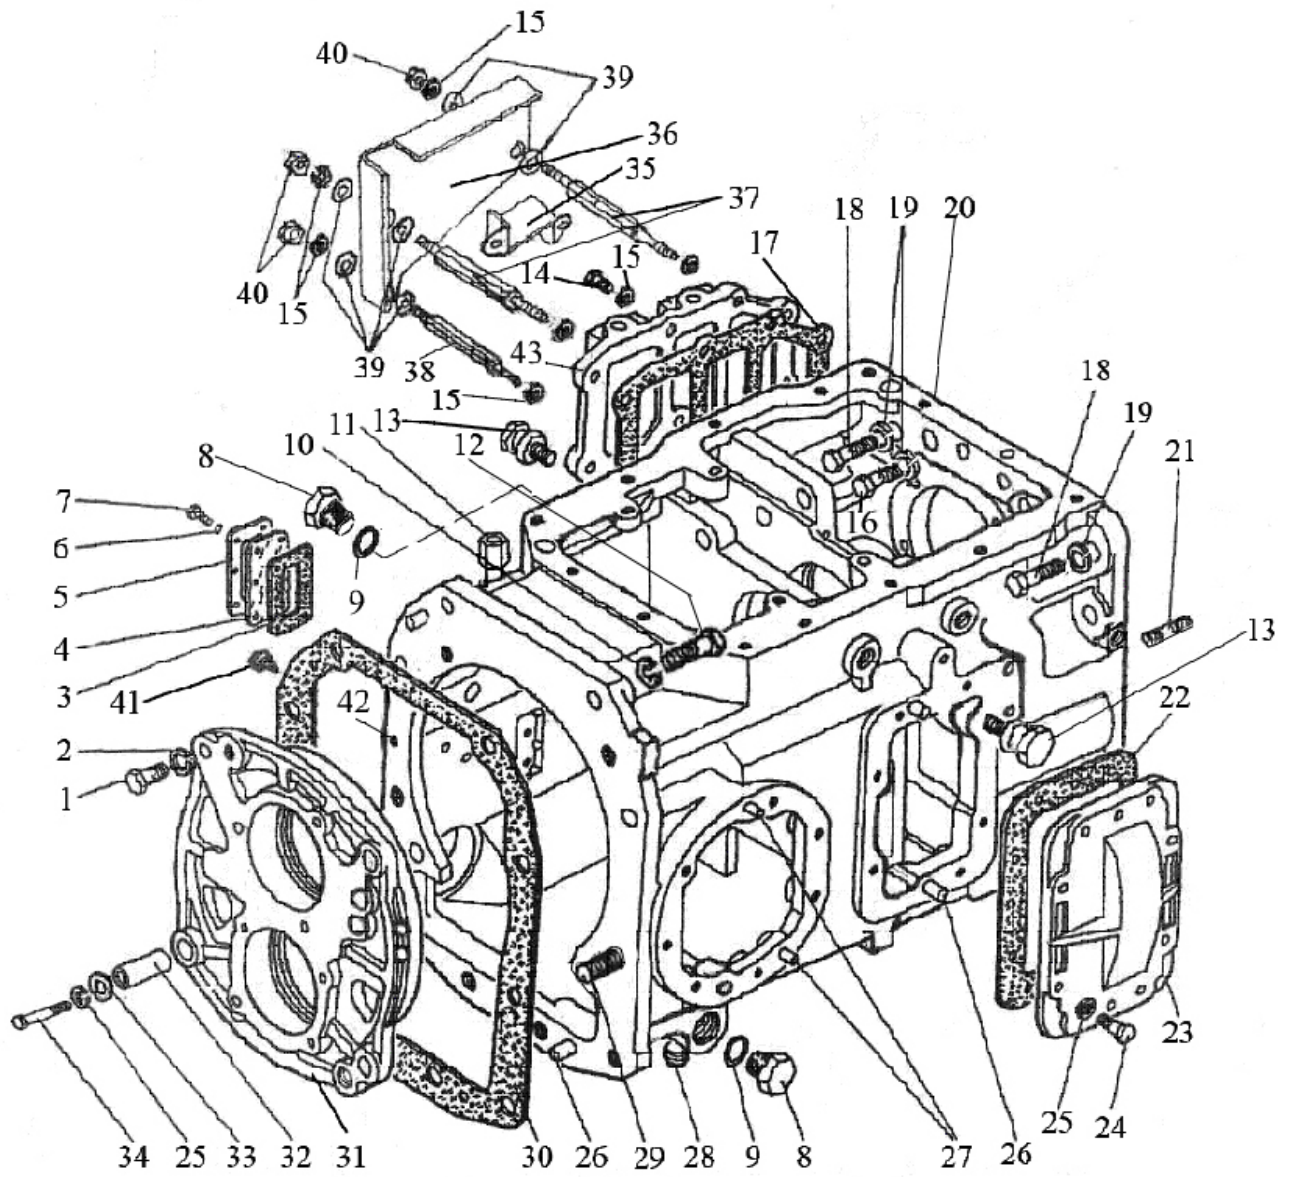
Gearbox 1222-1700010 (24F+12R)
